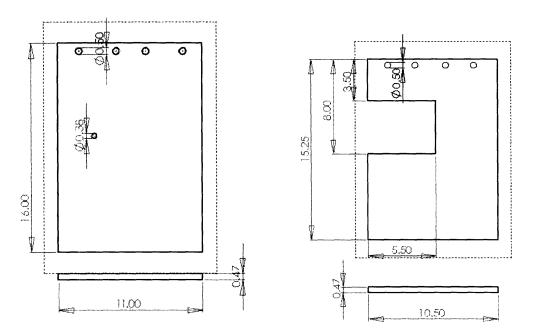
Dimensioned Drawings of the Cover and Base Boards
